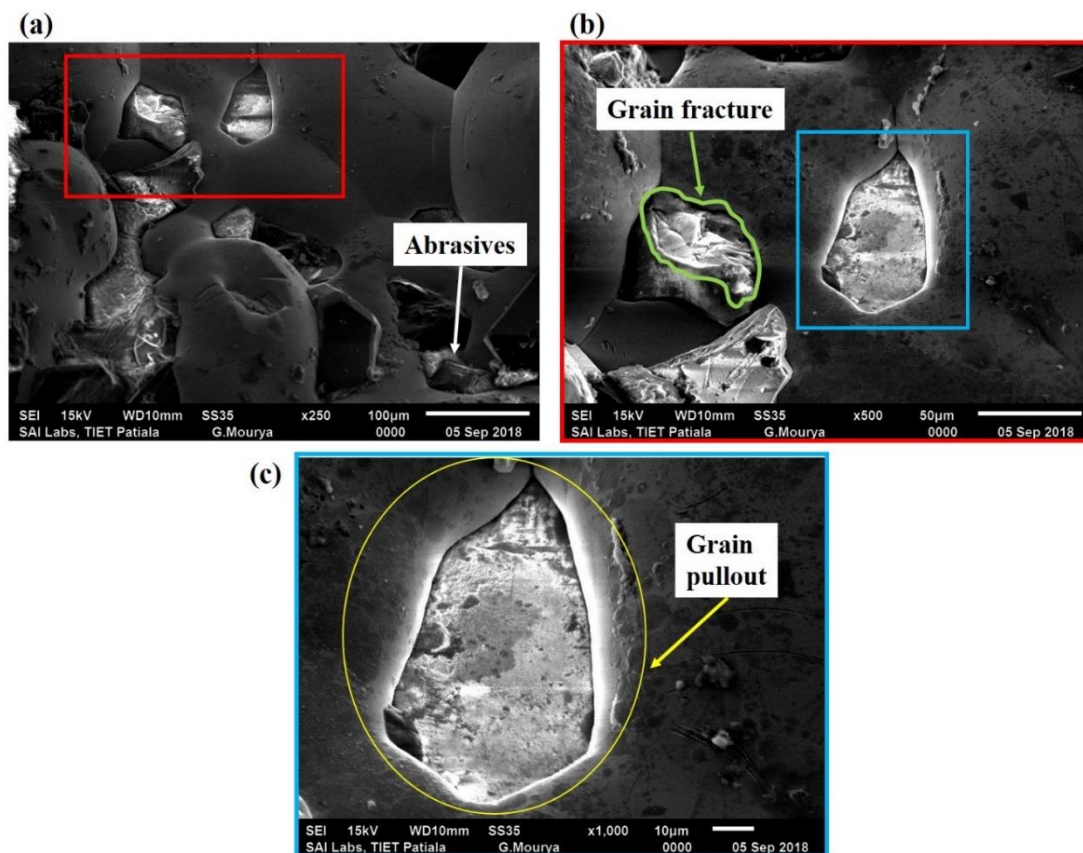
SEM micrographs showing tool wear after grinding at different magnifications (x250, x500, x1000): (a) end face of the cylindrical tool, (b) micrograph of Grain fracture at x500 magnification, (c) exaggerated image of an end face of tool indicating abrasive pullout (dislodging).
